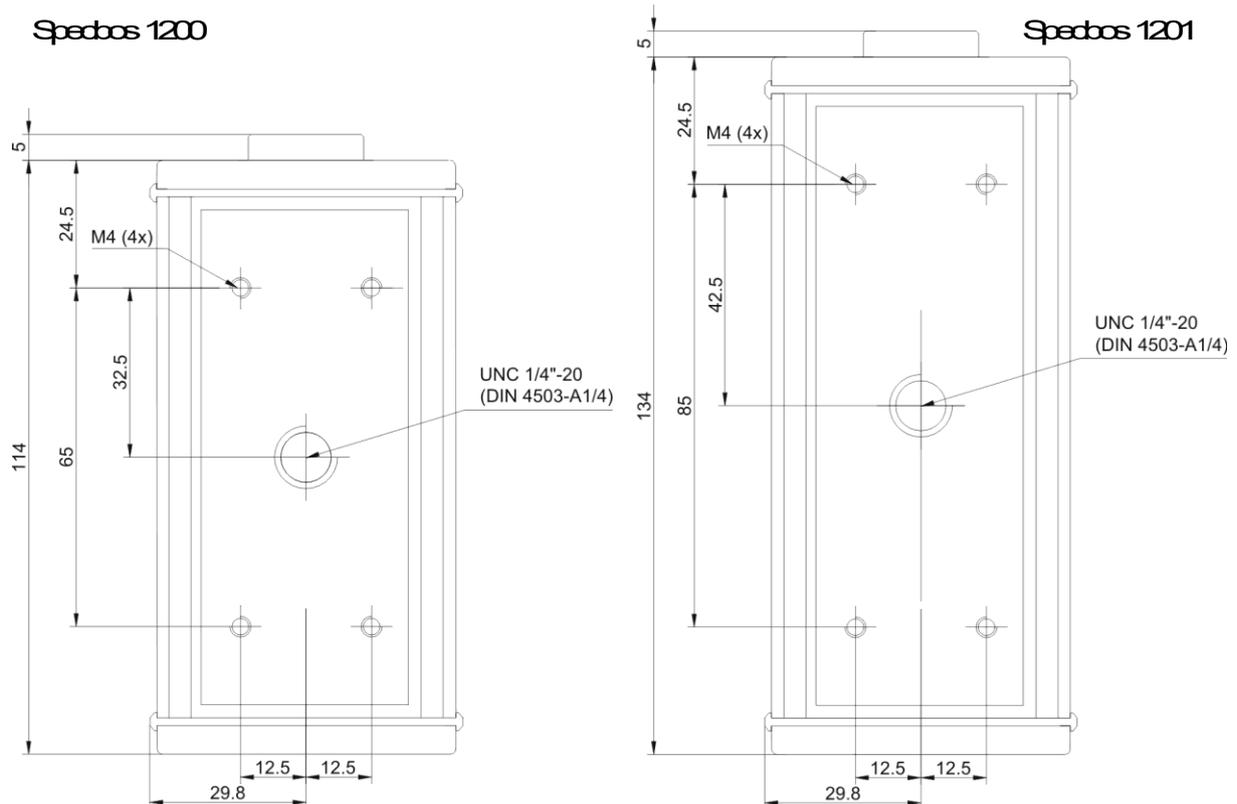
Fixing holes of specbos 1201 and specbos 1200
